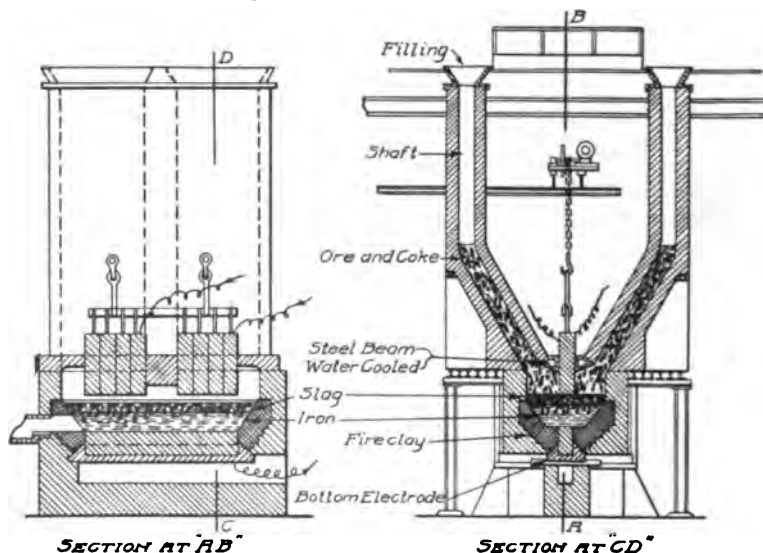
End and Side Sectional Elevations of an Electric Furnace for Making Pig Iron
